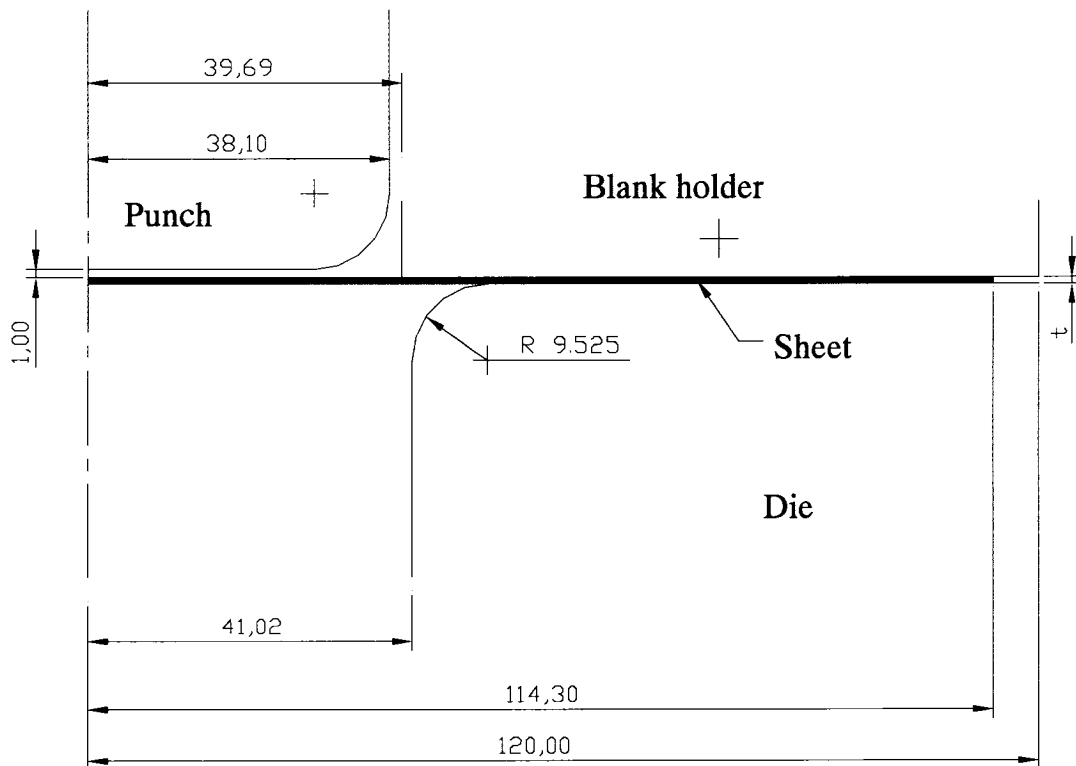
Model dimensions for draw bending simulations (dimensions in mm.)
